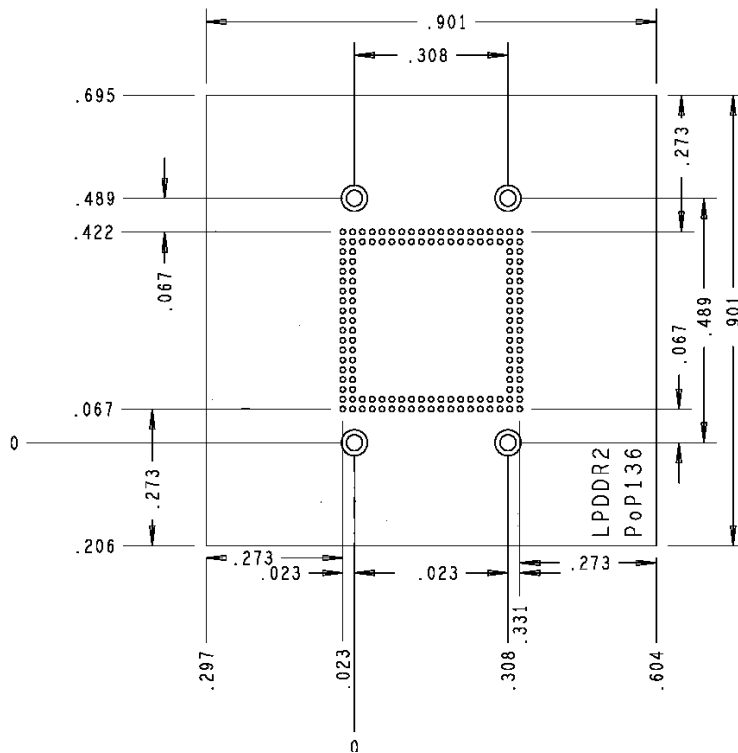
LPDDR2 136-Ball PoP Oscilloscope Component Interposer Dimensions
